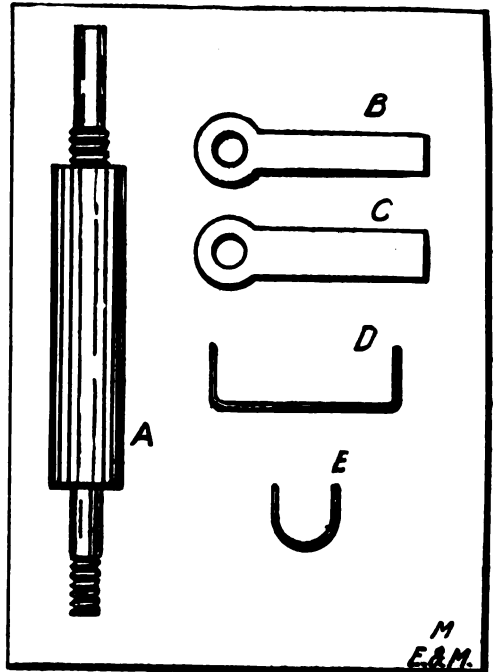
THE COMPONENT PARTS OF THE ELECTRIC FIRING DEVICE
